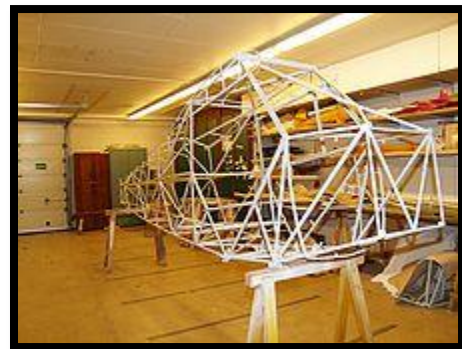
Piper PA-18 welded tube truss fuselage structure
